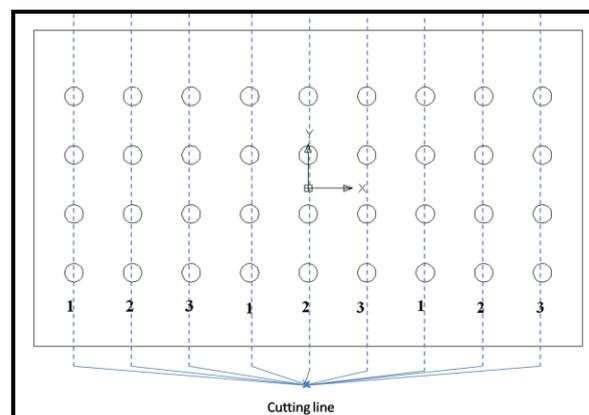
Layout of the cutting line of the drilled holes on composite specimen.
